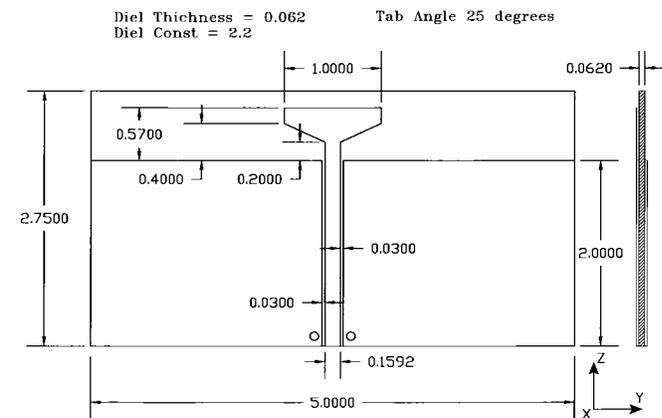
Dimensions of the prototype tab monopole with dimension given in inches.
